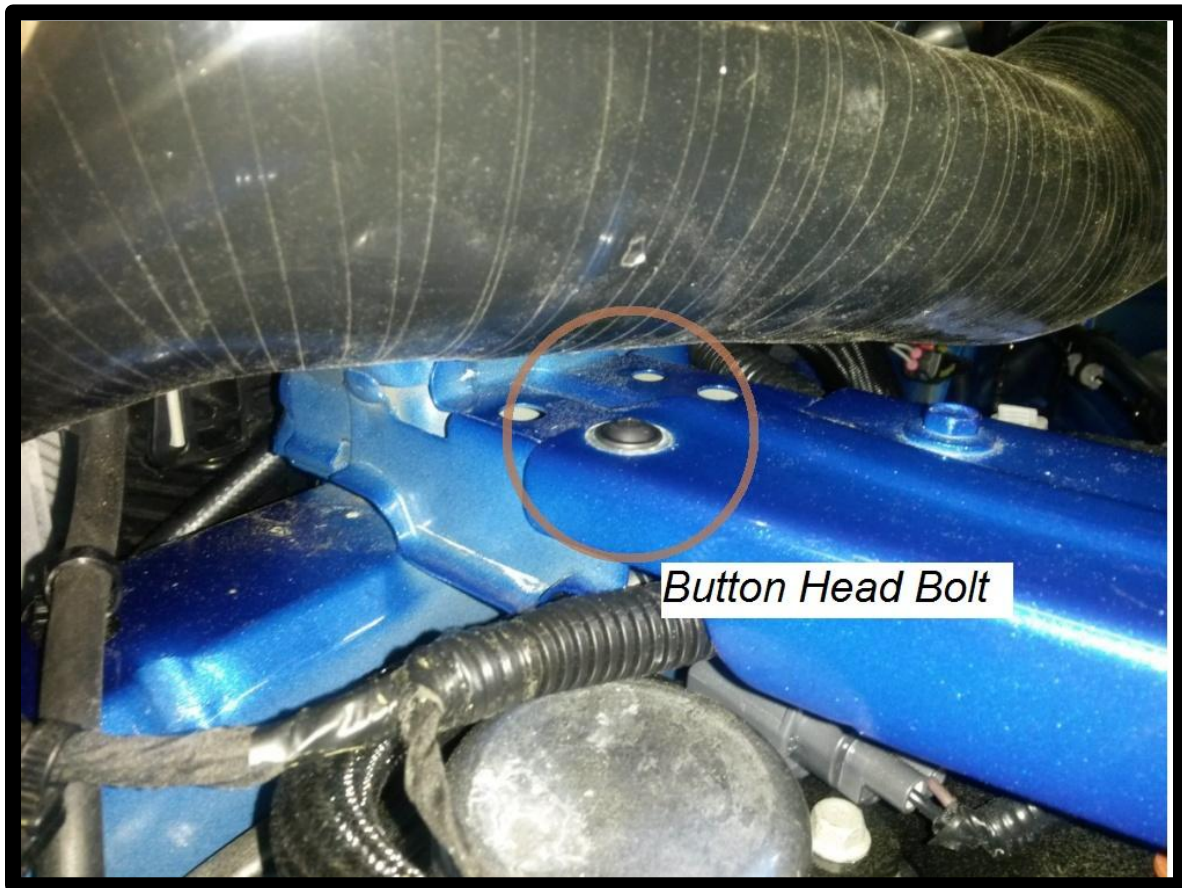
Location of Hex Head Bolt to be replaced with Button Head
